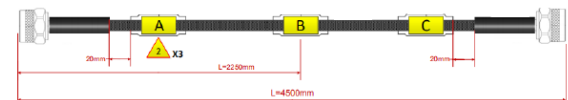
4.5m GPS Cable with N-type Connectors on Both Ends
